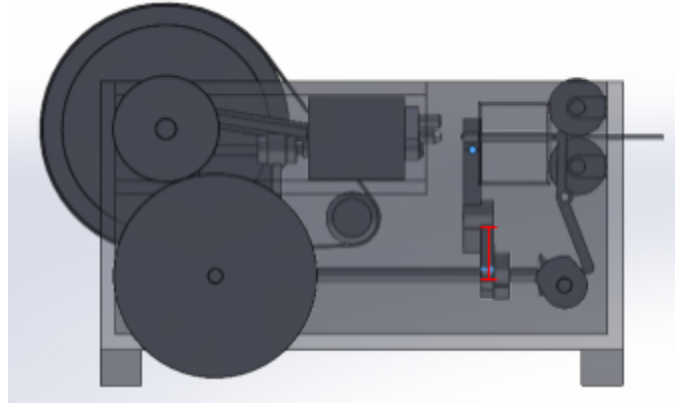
SolidWorks Assembly Showing Dimension for Shearing Force Moment Arm (red)
